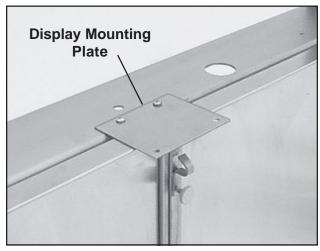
Mounting Plate on Sliding Carriage Cross Member
